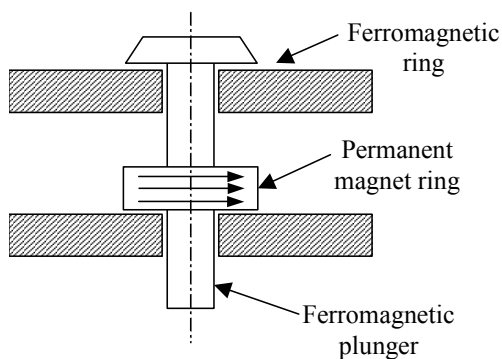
Design 2: holding mechanism with permanent magnet material attached to the plunger
